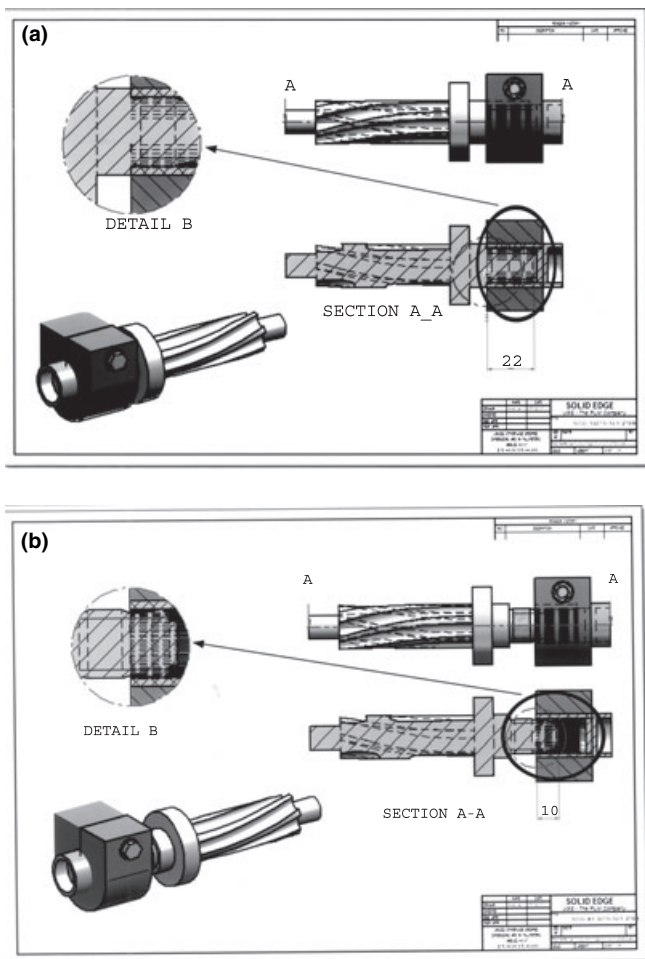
The cross-section of rack and pinion in which both are assembled: (a) Correctly, (b) Incorrectly.
